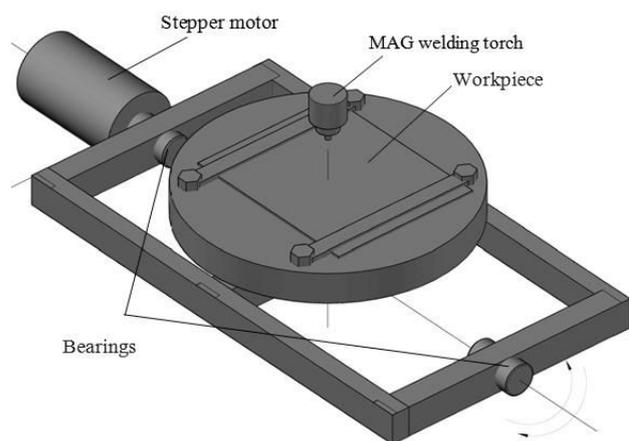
The welding frame scheme of transverse vibrations of the weld pool
